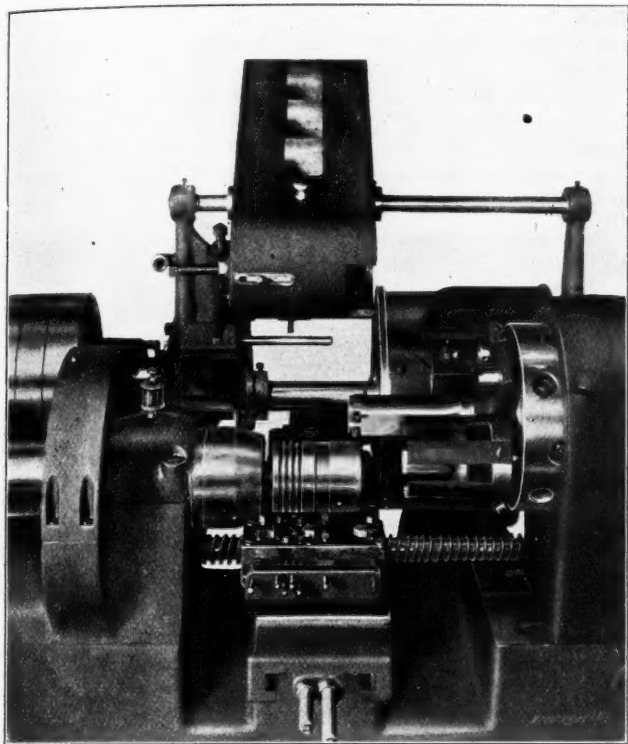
Cleveland Automatic Screw Machine operating on Piston shown in Fig. 2.
